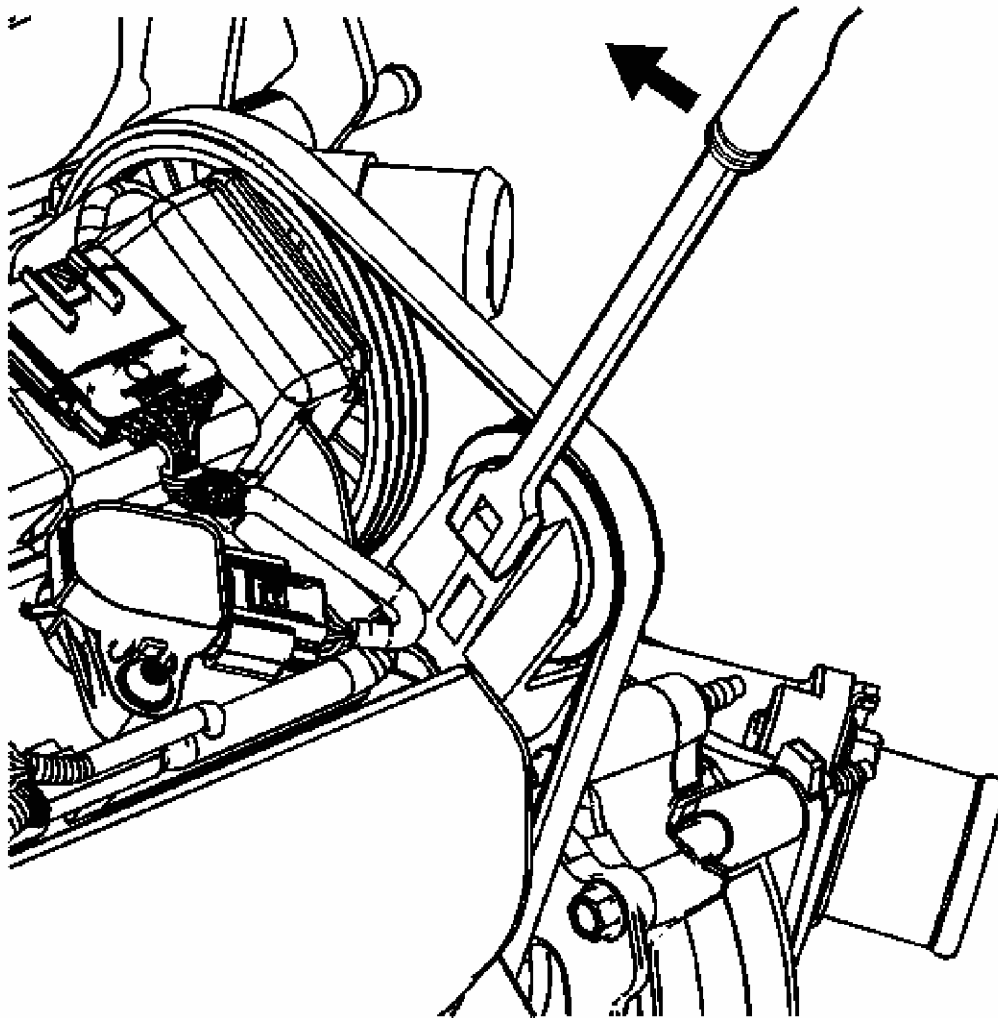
Rotating Water Pump Drive Belt Tensioner
